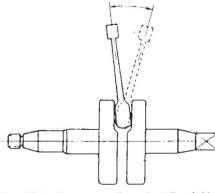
Move connecting rod small end sideto-side as shown to determine rod, bearing and crankpin wear. Refer to text.
